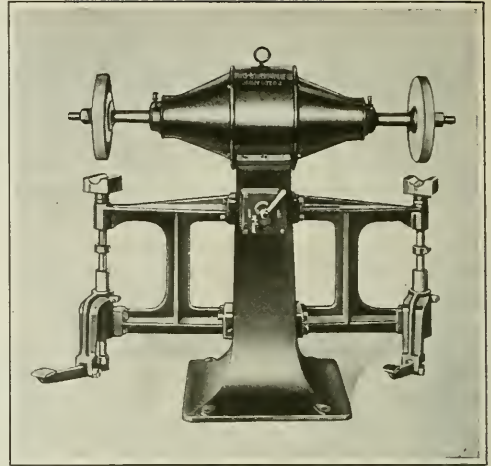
Machine for grinding off Ridge produced in Welding
